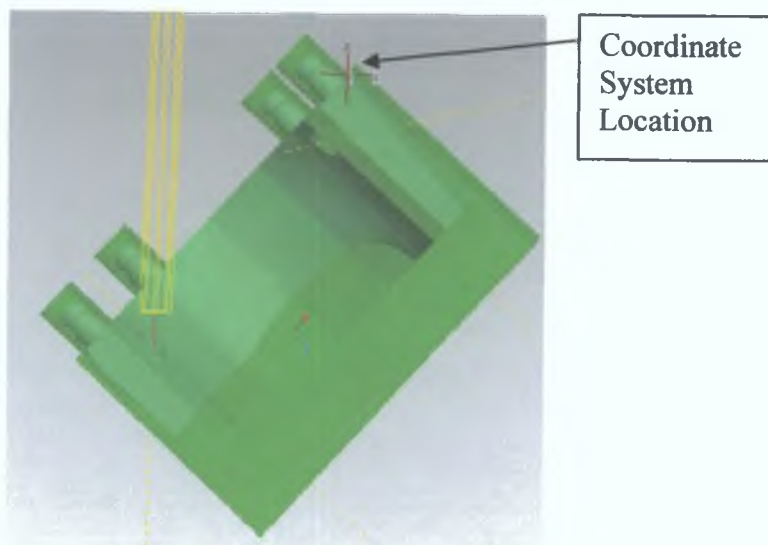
Counterbore Sequence ProEngineer Tool Path.
